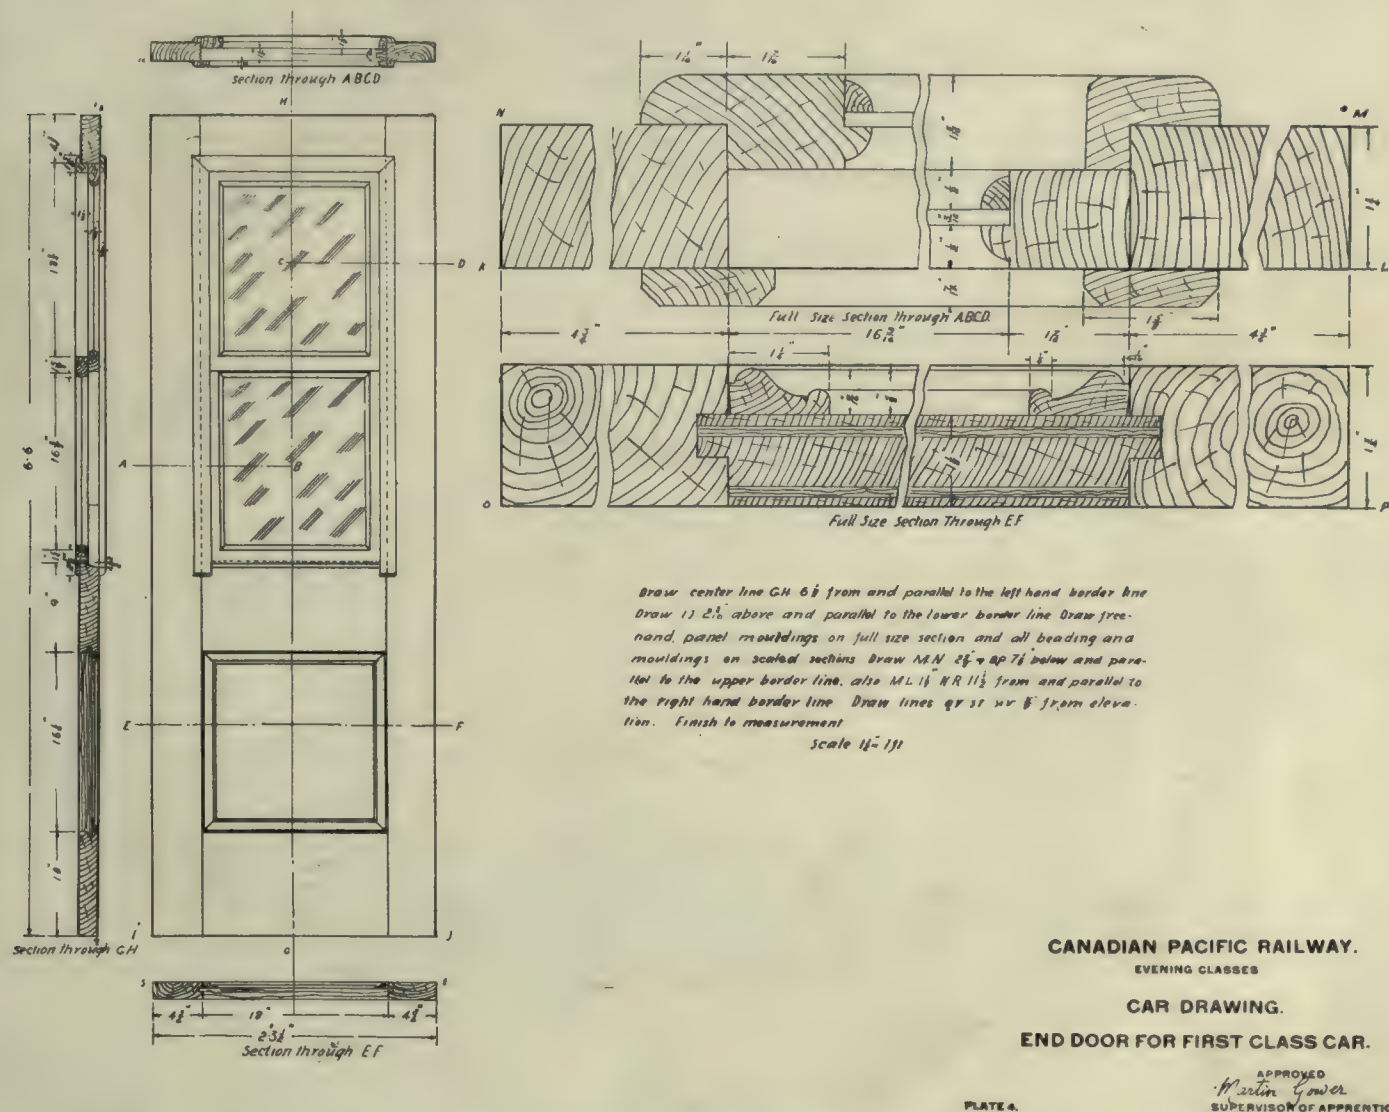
Sample of Car Drawing Lesson Sheet.
